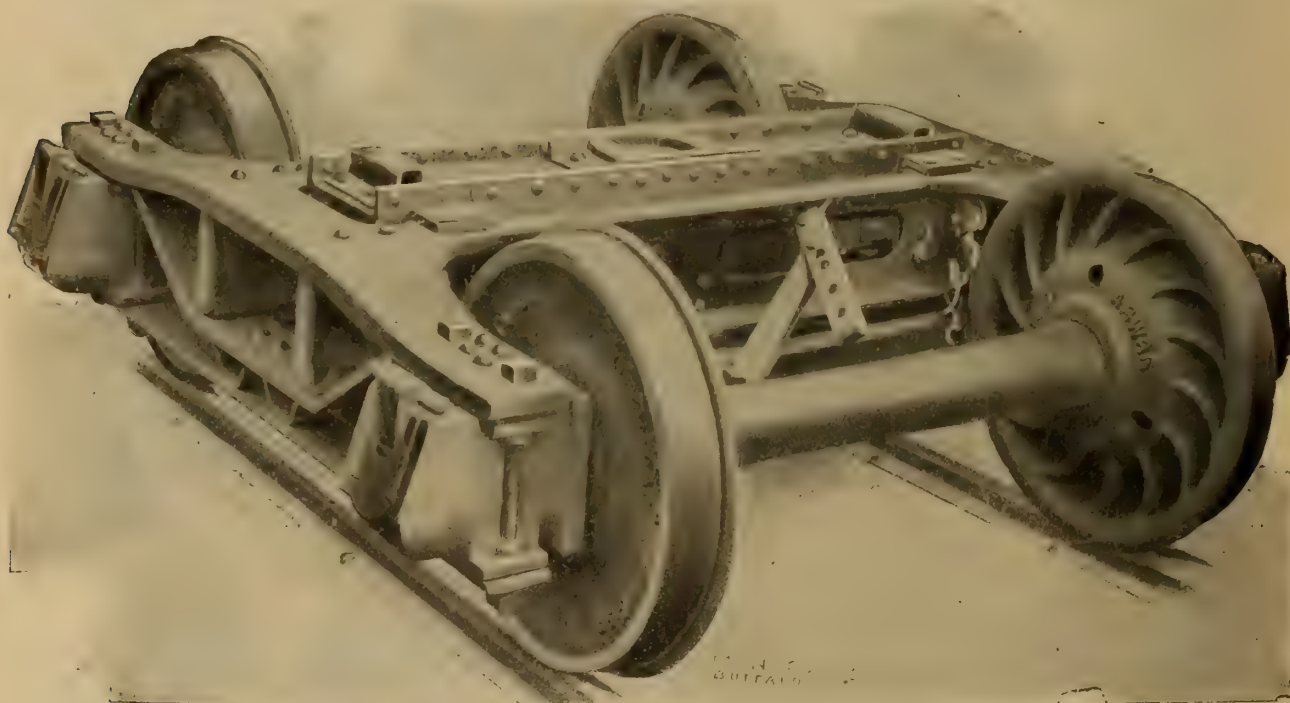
PRESSED STEEL DIAMOND ARCH BAR TRUCK. PRESSED STEEL CAR CO., MAKERS.
